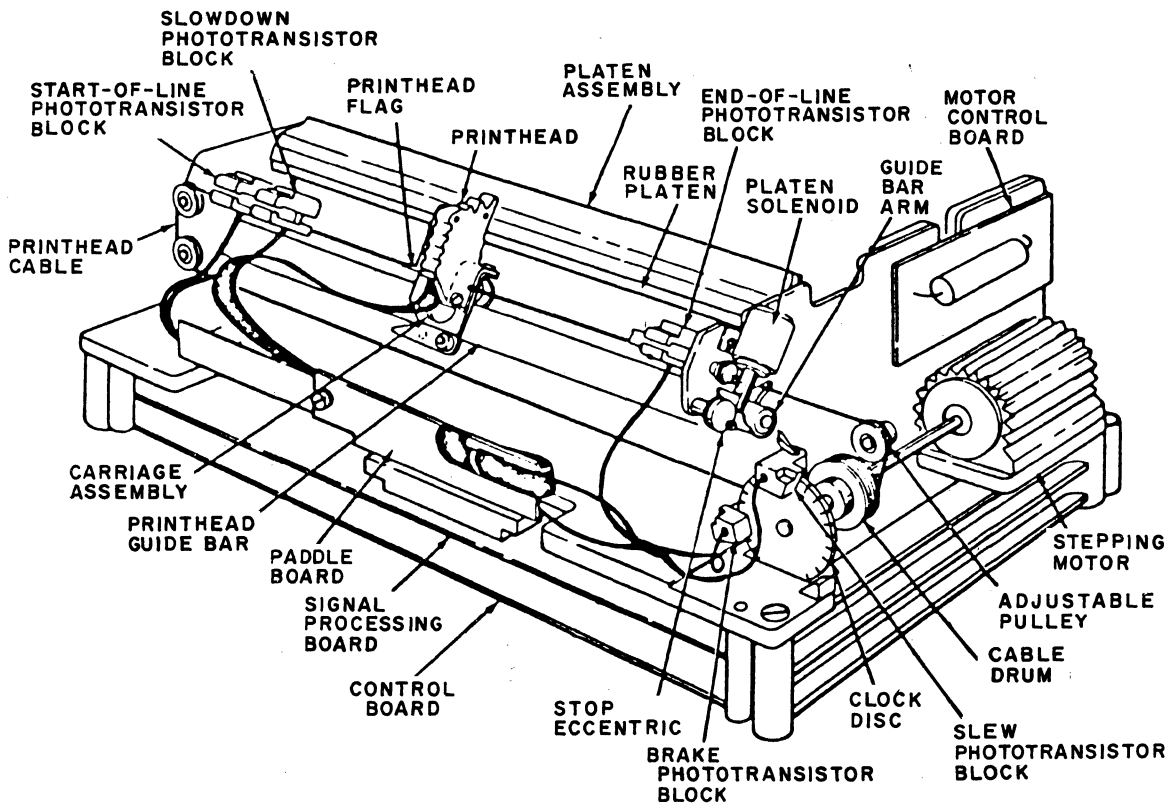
Nonimpact Printer Print-Mechanism Assembly
